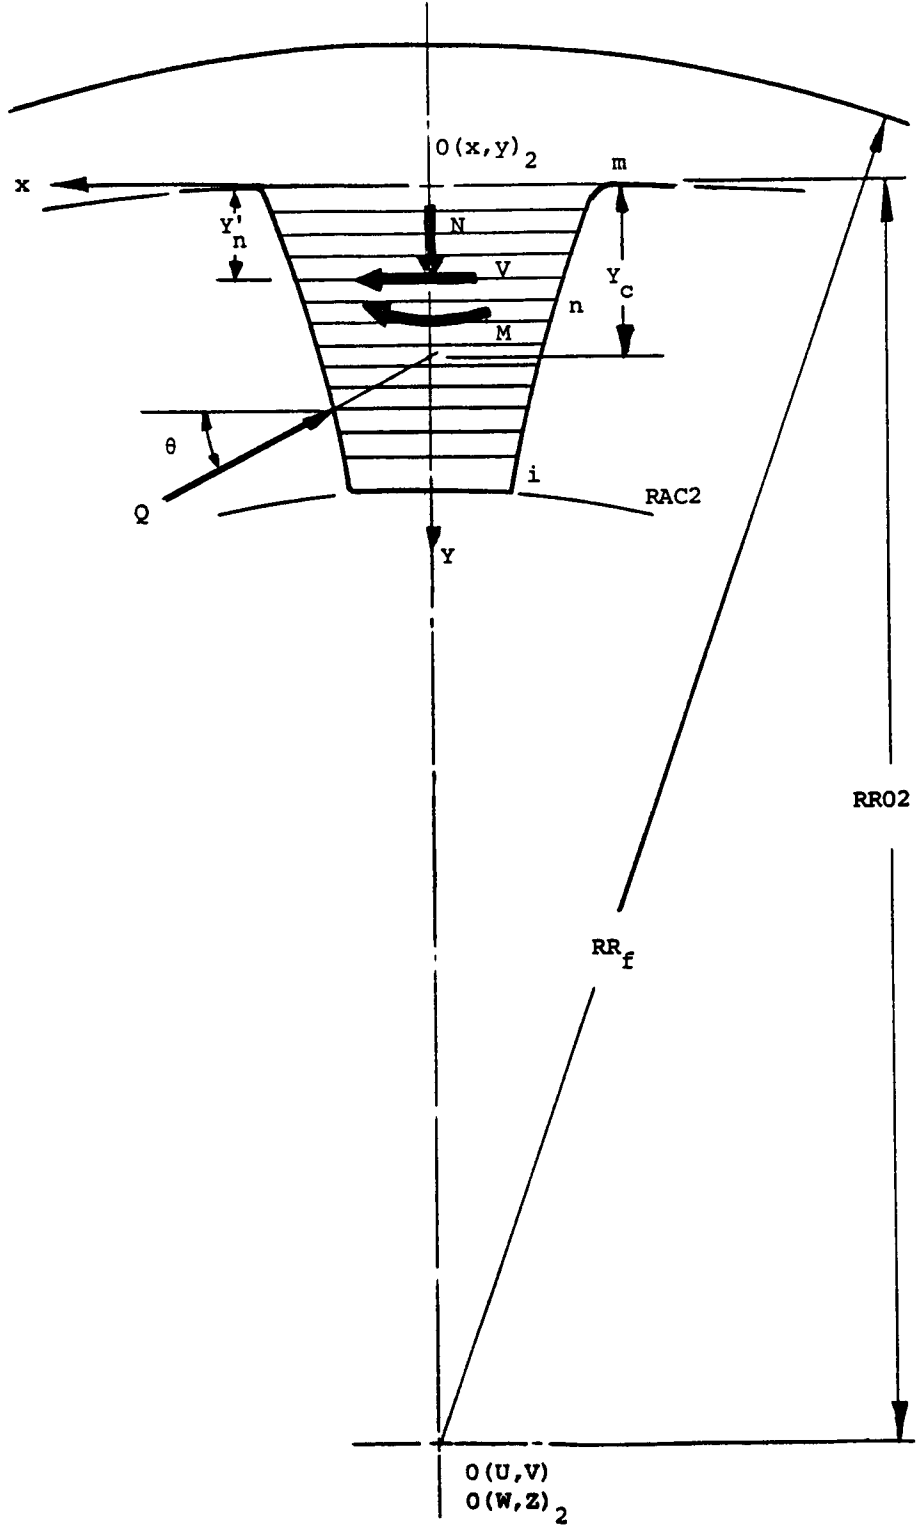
Internal Gear Tooth Bending, Shear and Normal Deflection Model
